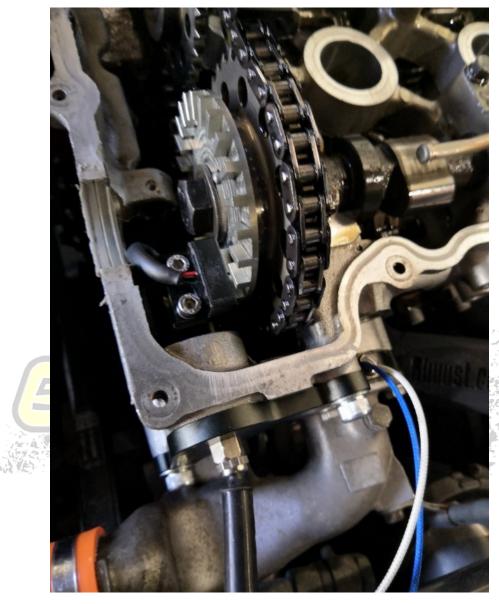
Installation of the Cam Trigger Kit is Now Complete
